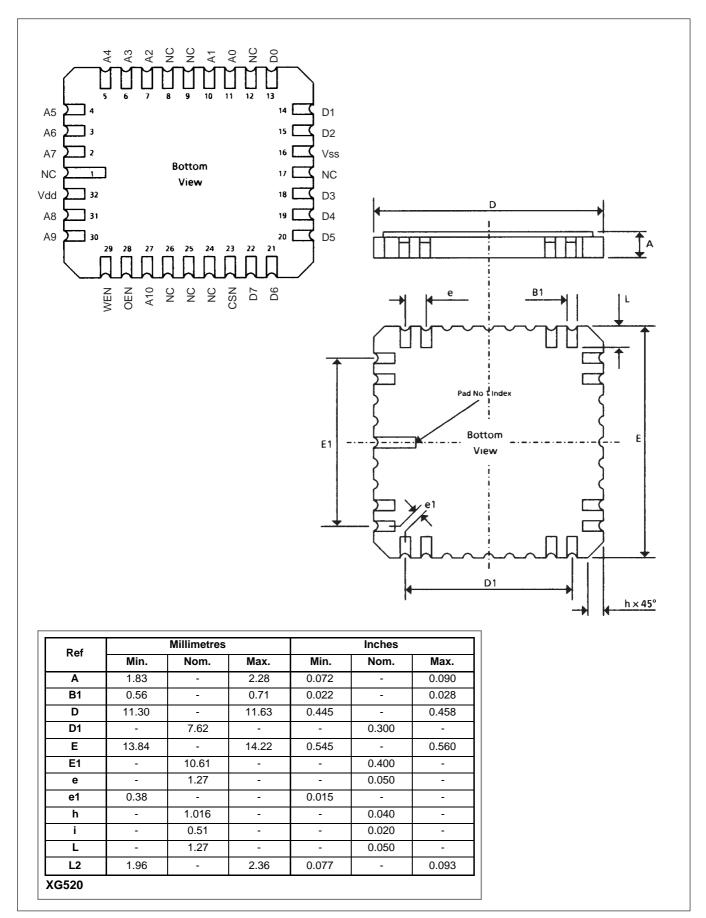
32-Pad Leadless Chip Carrier - Package Style L
